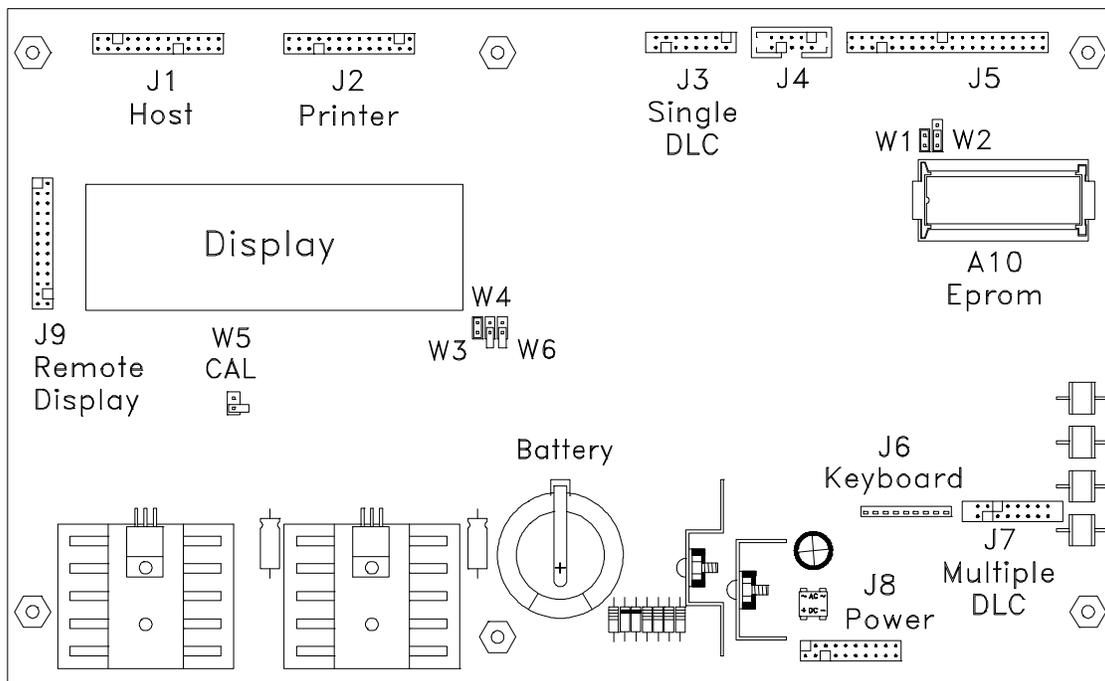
Main PCB, Battery and Jumper W6 Location
